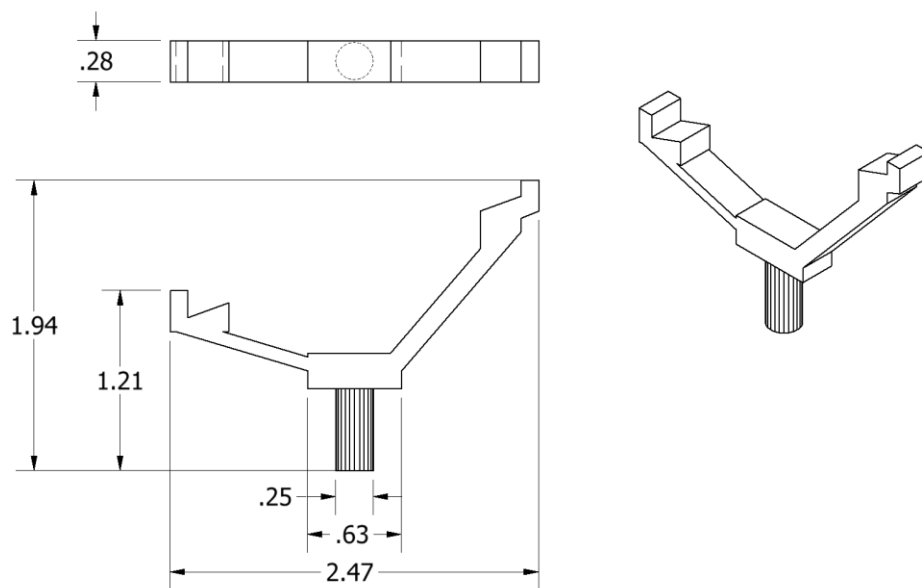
Edge holder for Stardust testing. Dimensions in inches.
